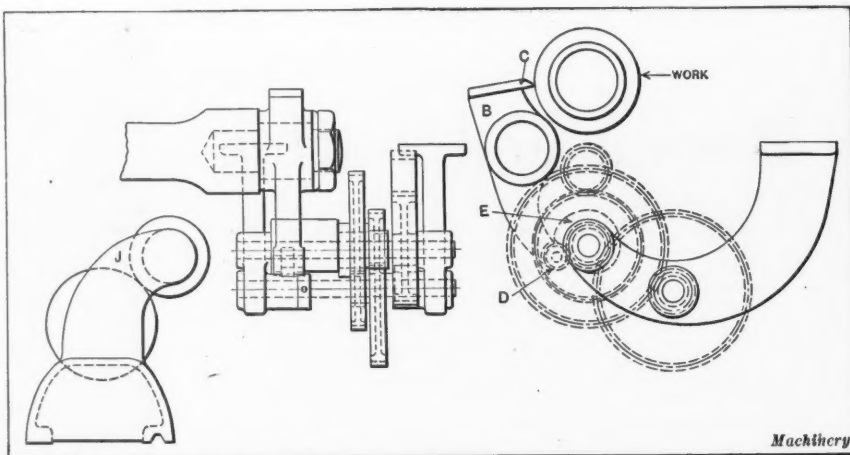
Views of the Piston Facing Attachment from the Front and Ends, showing Details of the Mechanism
